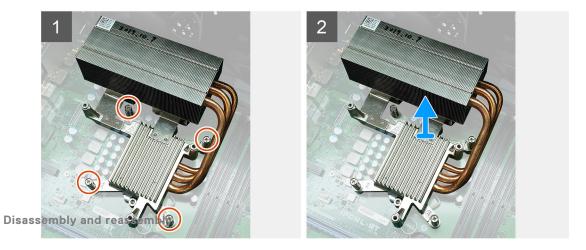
Heatsink assembly - 65 W or 80 W CPU
